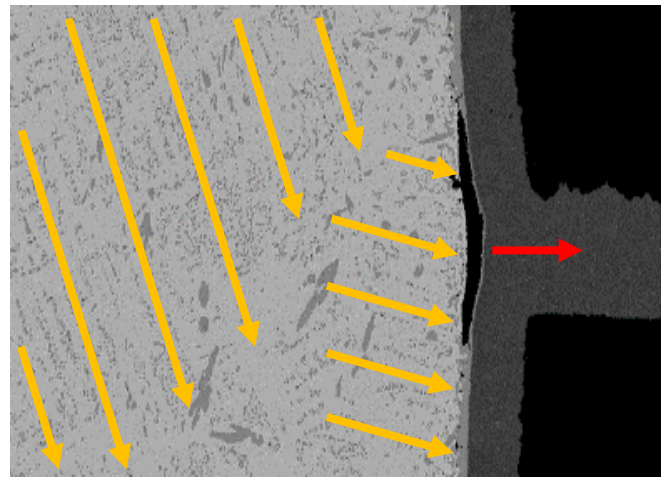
Directional solidification of a THT solder joint (represented by yellow arrows). Tensile stress due to PCB shrink (represented by red arrows).
